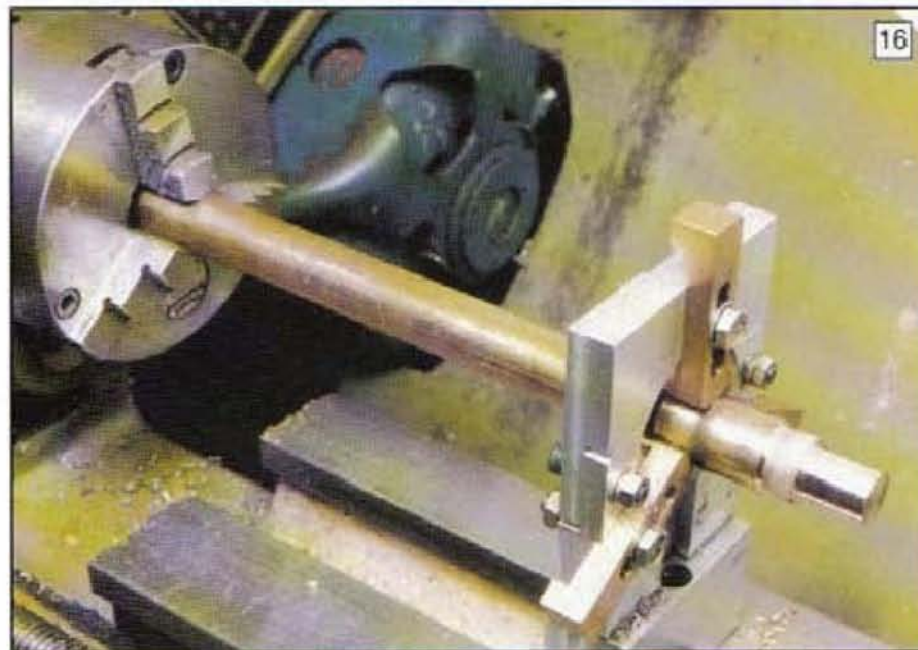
Making the vial tube ends; the fixed steady is being used to minimise scrap.
